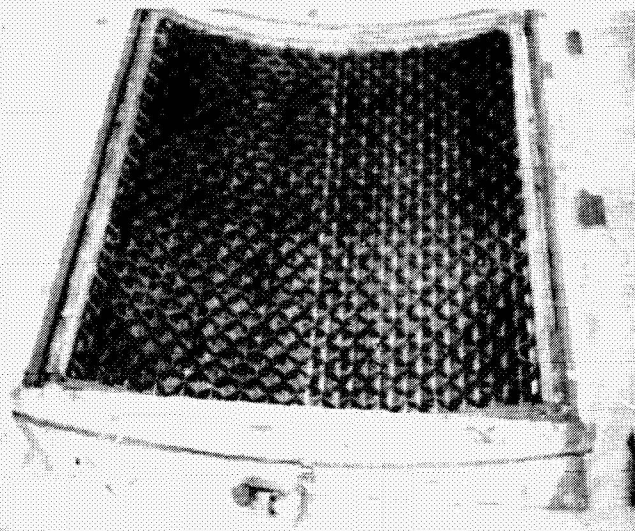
Assembly Tool for Cylindrical Panel with Core in Place (Contract NAS3-14384)
